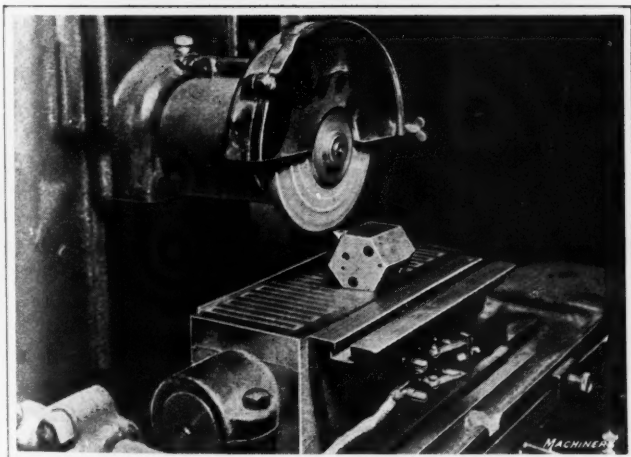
Grinding One Side of Thread-cutting Tool on Surface Grinder
